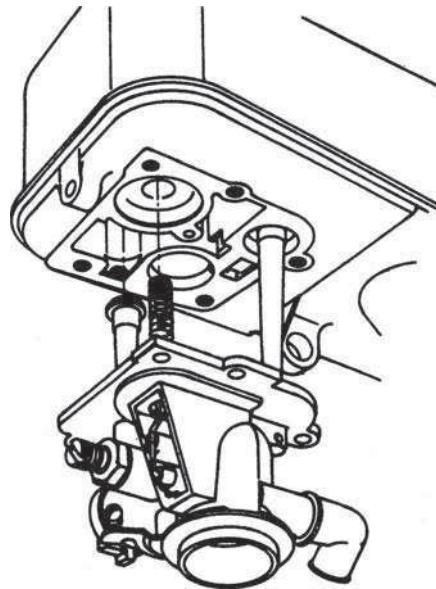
With the parts inverted, mate the carburetor to the tank. Turn the assembly over and lightly start the hold-down screws. The parts must be free to move relative to each other. Briggs & Stratton Corp.
